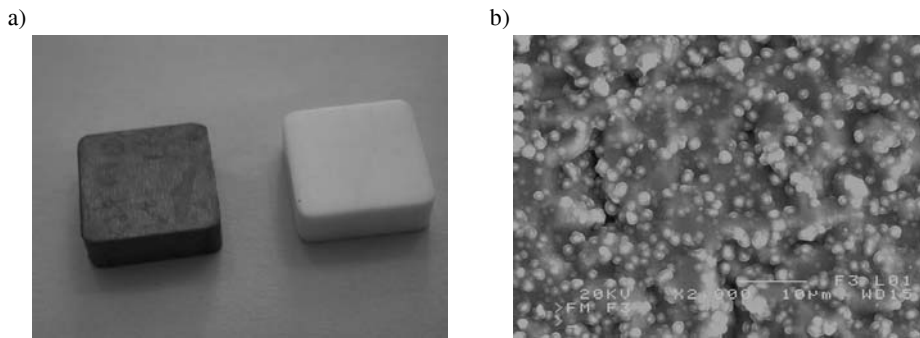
Photographs of the cutting tools: a) sintered aluminium oxide with the Ti-C coatings, and without the coating (white), b) SEM image of the surface of the Ti-C coating
